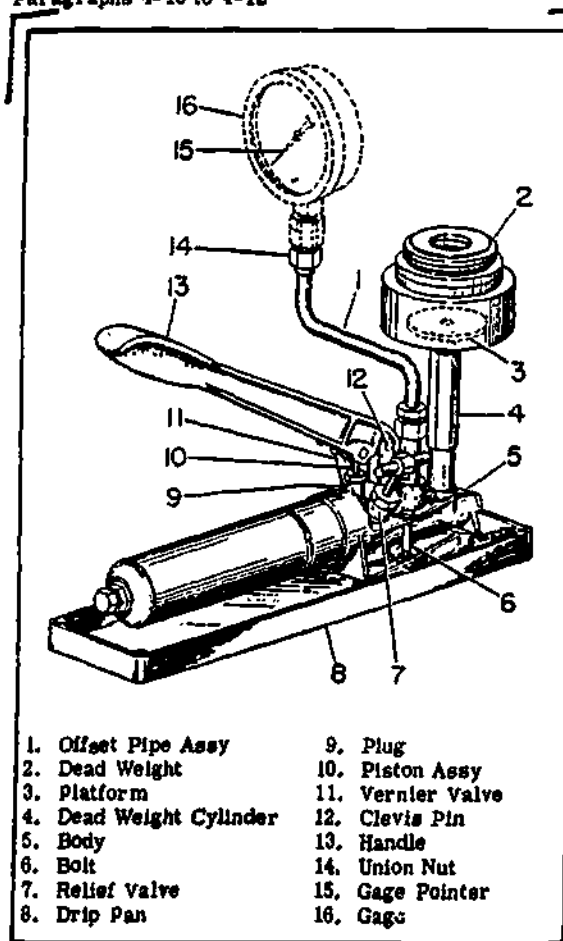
Setup of Part Number 10-10525 Hydraulic Pressure Gage Dead Weight Tester for Operation (Serial Numbers 1056-6 through 1056-60)
